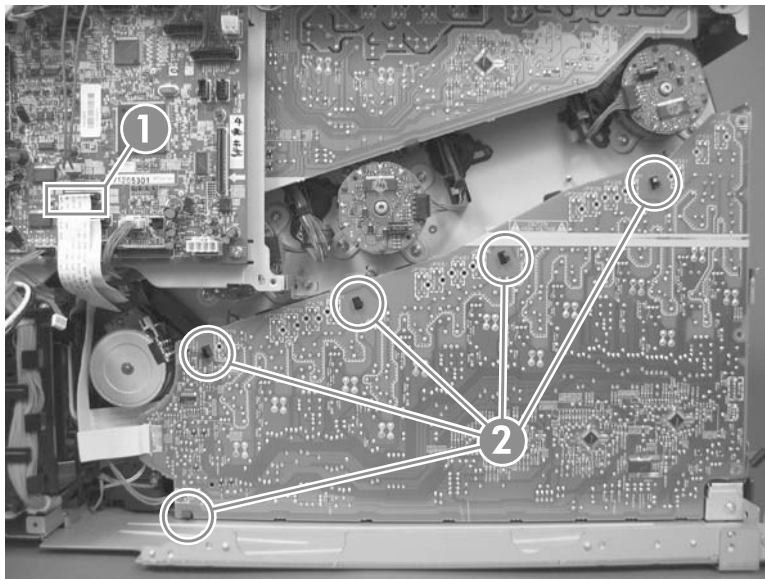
Remove the high-voltage power supply lower (2 of 4)
